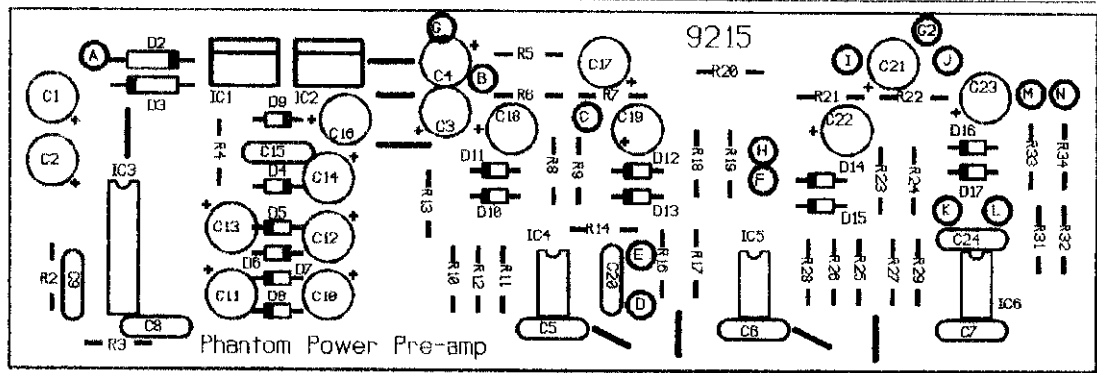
Components mount on the circuit board as shown in this parts placement diagram.
